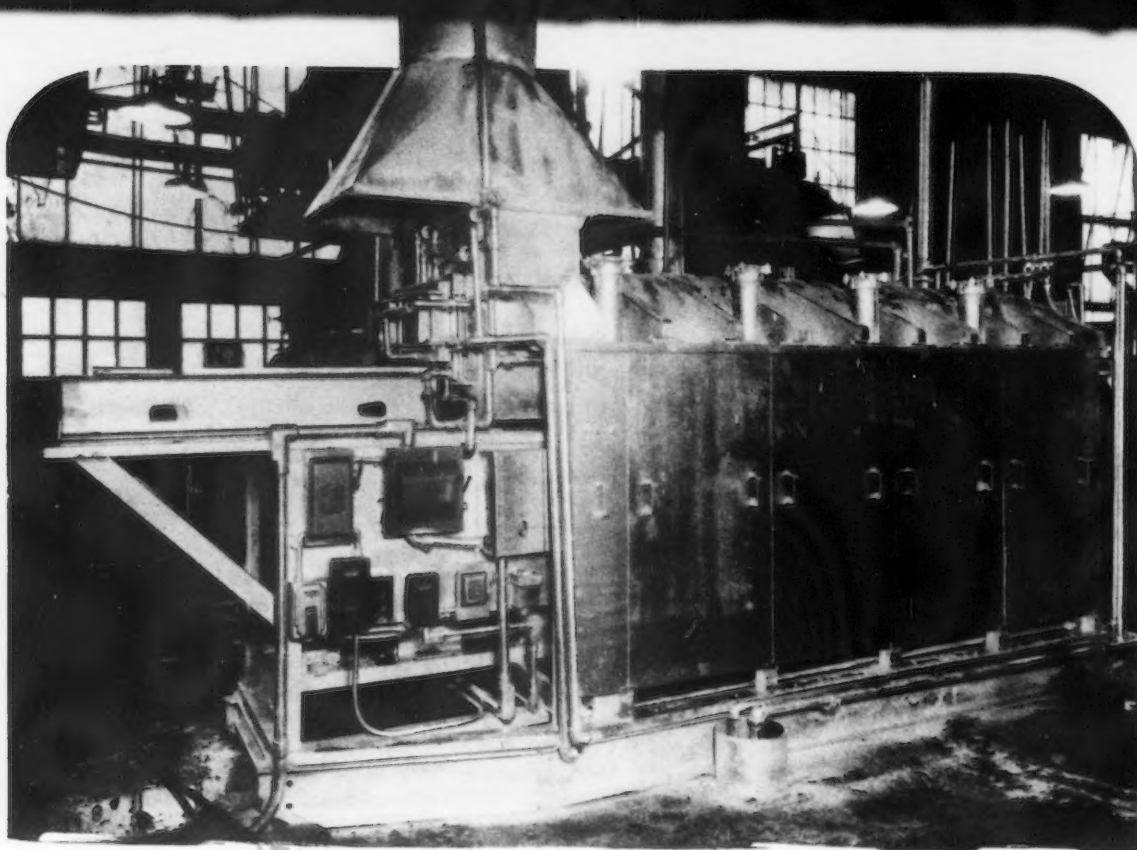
Sideview of SC rapid billet heater showing top of furnace heater tube, enclosed lower sections containing piping and controls, and the pusher type charging unit.
